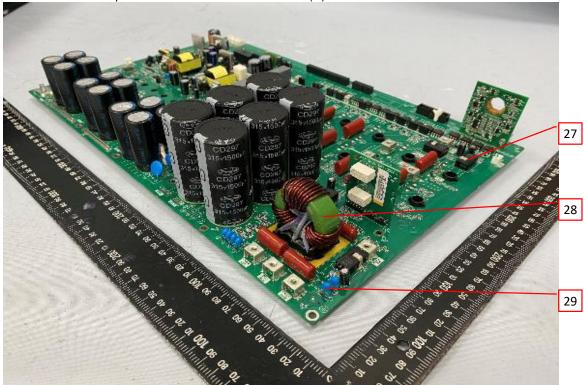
PCB Component Side View - 16-501752-00G(C)
